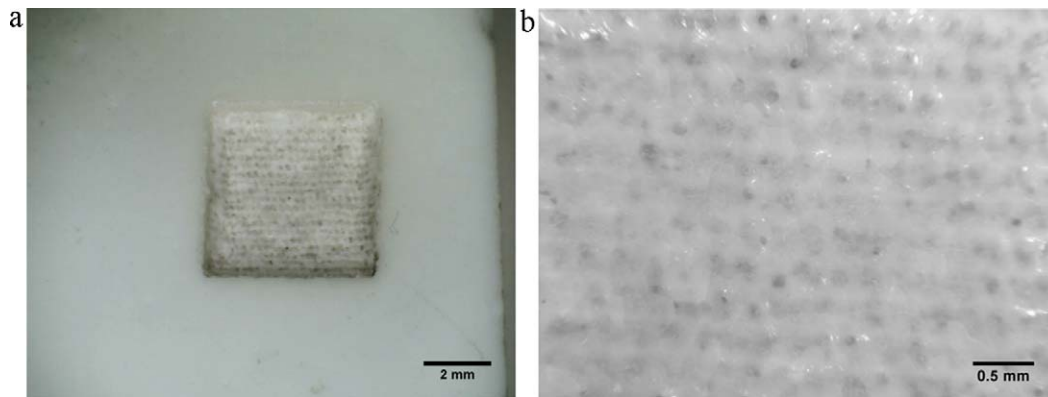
The optical micrographs of CO₂ laser machined alumina cavity in water at a power of 60 W, a speed of 10 mm/s and 50 scanning cycles with drawn dimension of 5 mm × 5 mm. (a) Top of the cavity and (b) a close-up view of the recast layer on the bottom surface. The thickness of water layer is about 4 mm.
